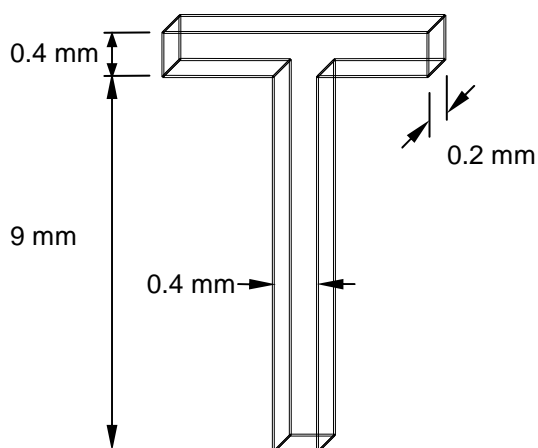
Dimensions of the 'T' milled into the Perspex block.
